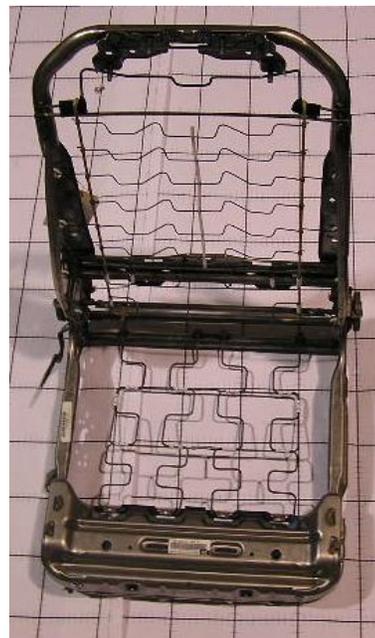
Front Passenger Seat Image F.5-8: Front Passenger Seat Frame
